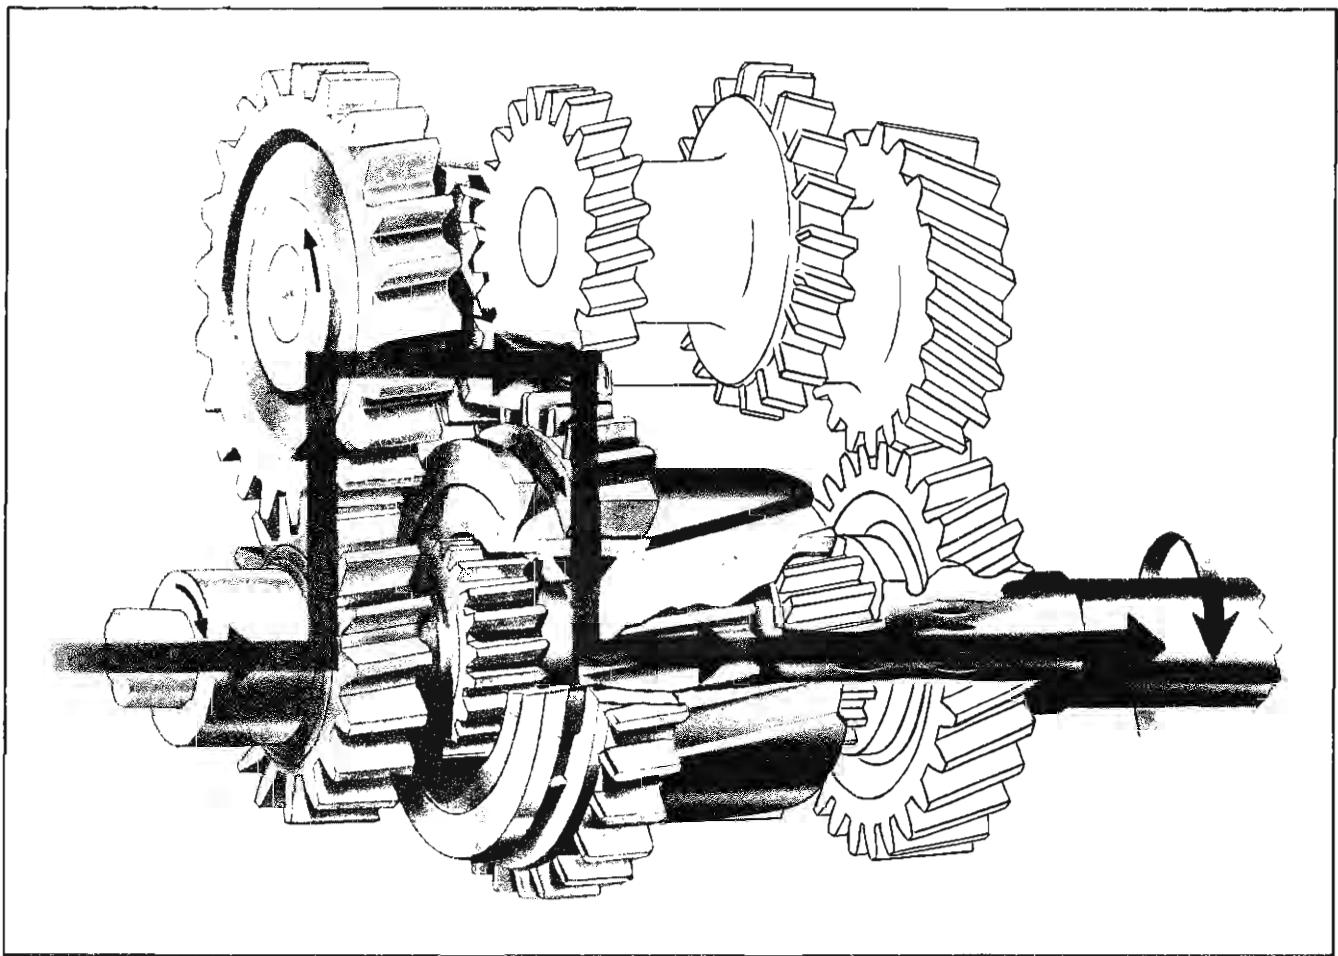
Power Flow with Transmission Gears in First Gear Position
